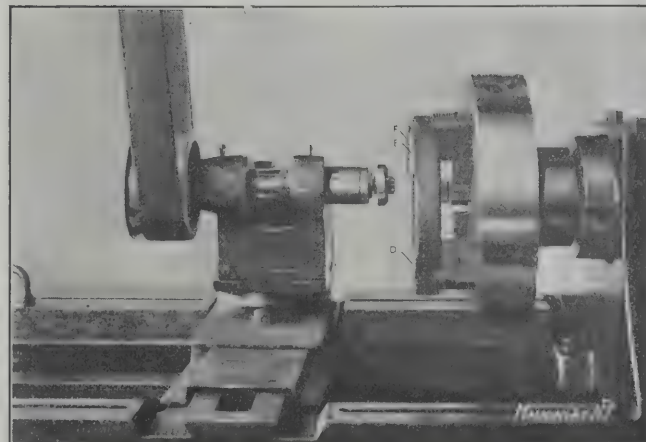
Milling Friction Bands for Countershafts, in the Lathe
